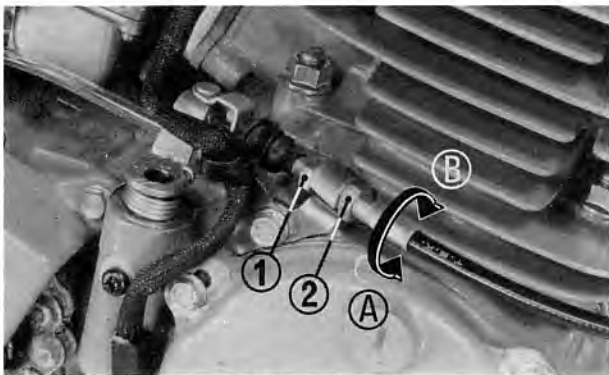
(1) Lock nut (2) Adjusting nut
